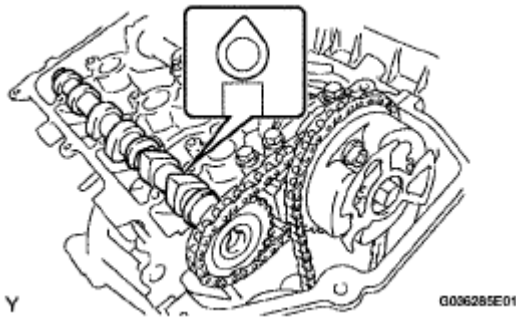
Identifying Camshaft Timing Gear And Chain Tensioner No. 2
